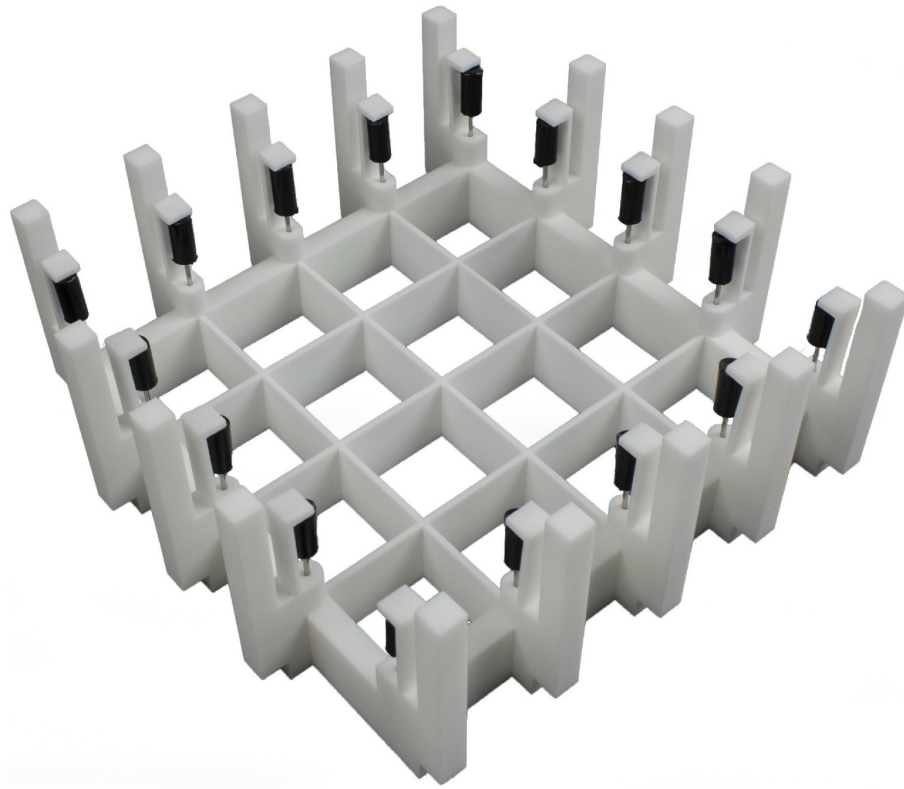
Manufactured frame. Pins are shown placed into position in the frame.
